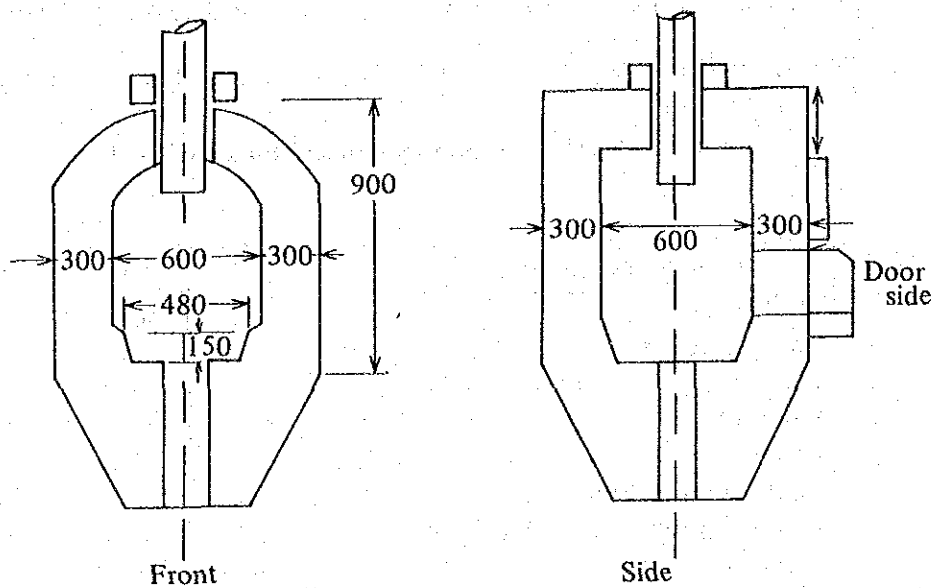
Front and Side View of No. 2 Arc Furnace
